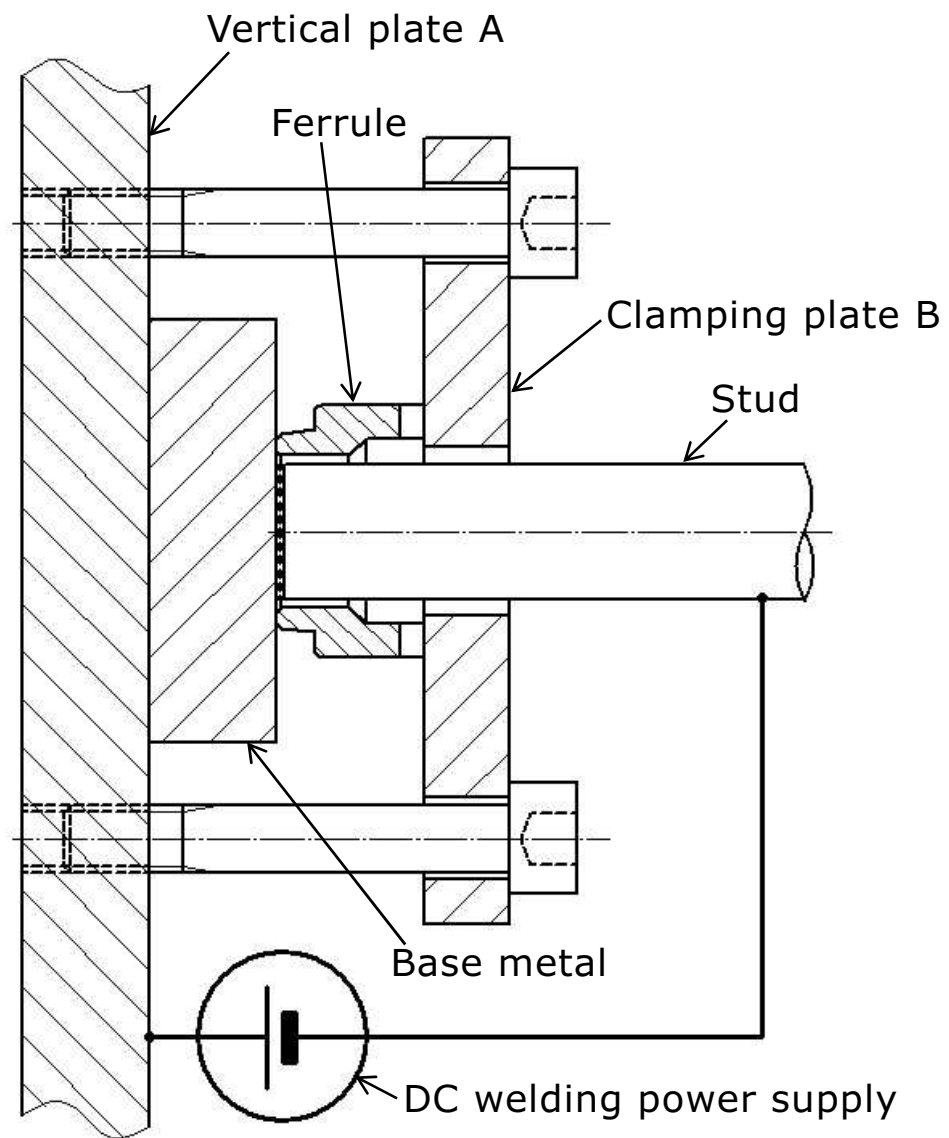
Schematic drawing of apparatus for arc stud welding
